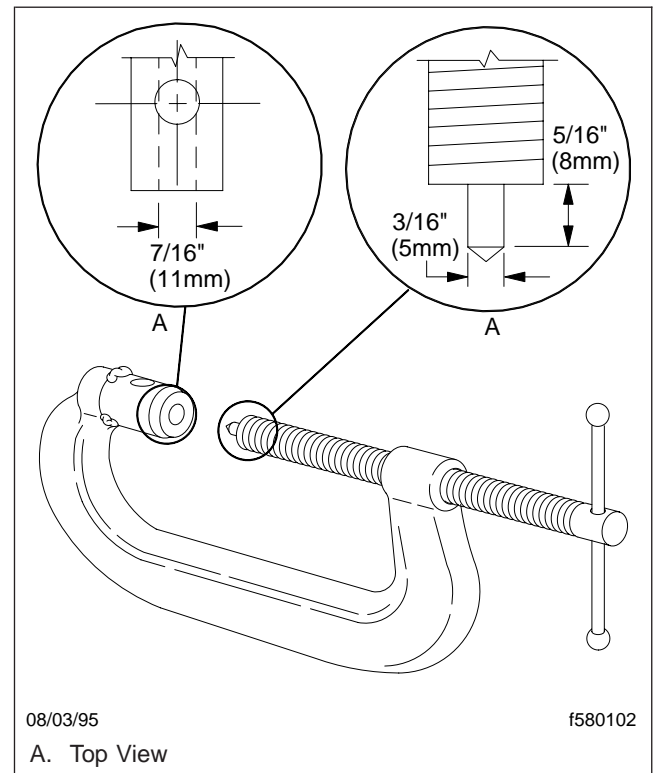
, C-Clamp Specially Adapted for Removing Henrob Rivets
